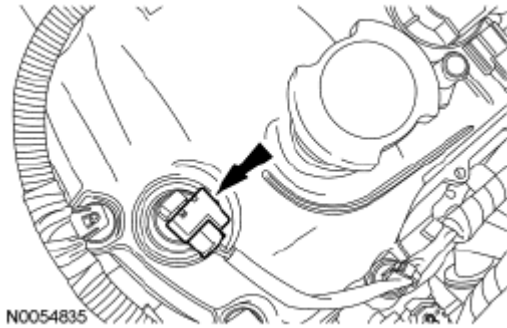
Locating LH VCT Solenoid Electrical Connector
